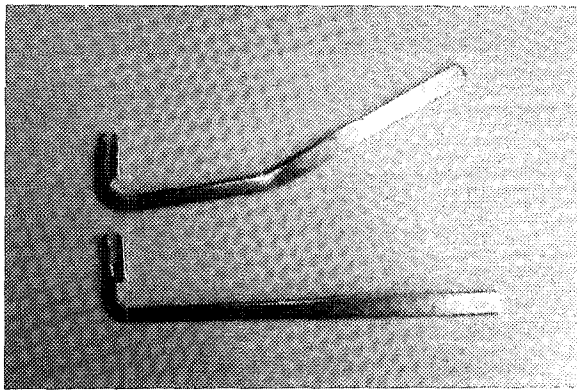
lower tool: a well-designed spoon bender; and upper: the same tool bent to provide key clearance on console pianos.
